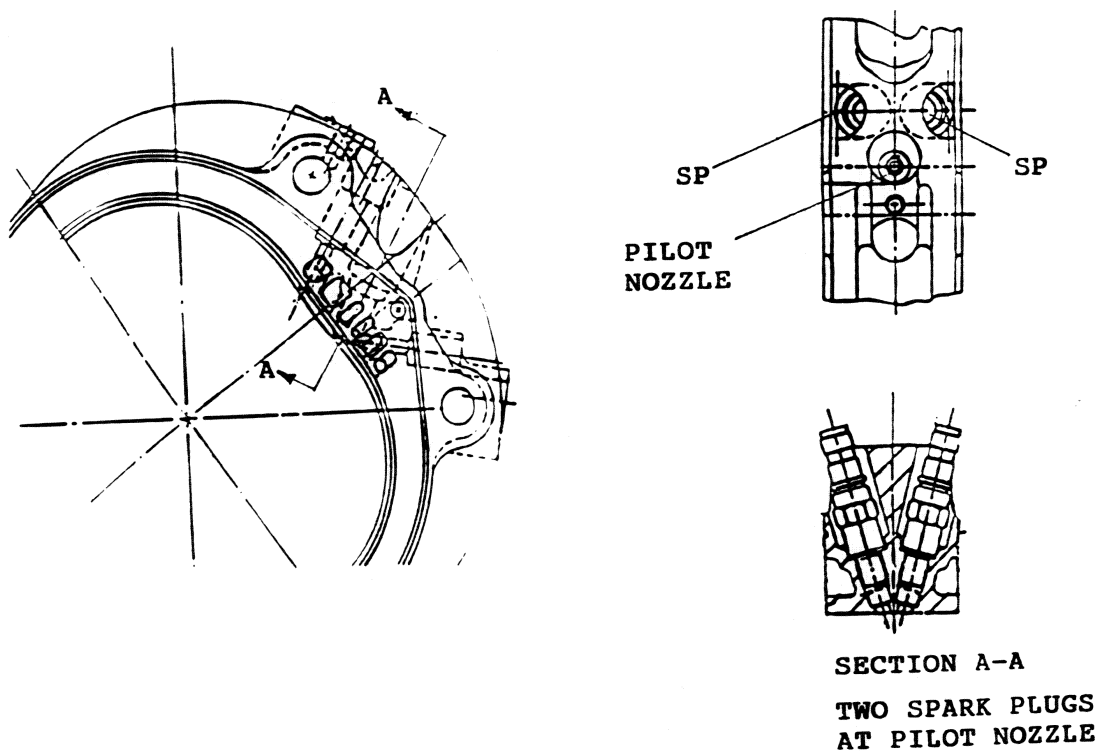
shows the dual spark plug installation for the 40 cu.in., 70 Series rotor housing.
